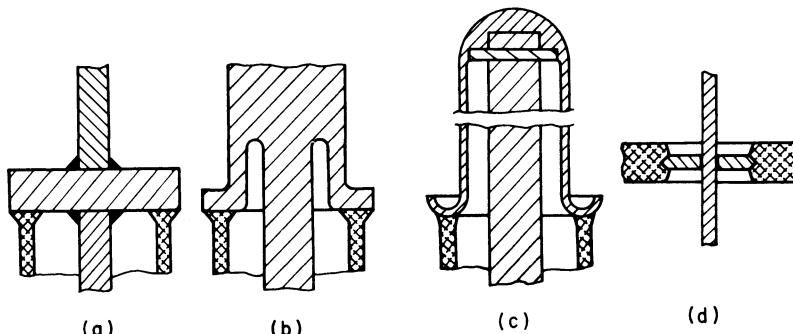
Lead-throughs with disc seals: (a) metal disc with brazed connexion; (b) machined disc; (c) spun disc; (d) molybdenum disc sealed in quartz
